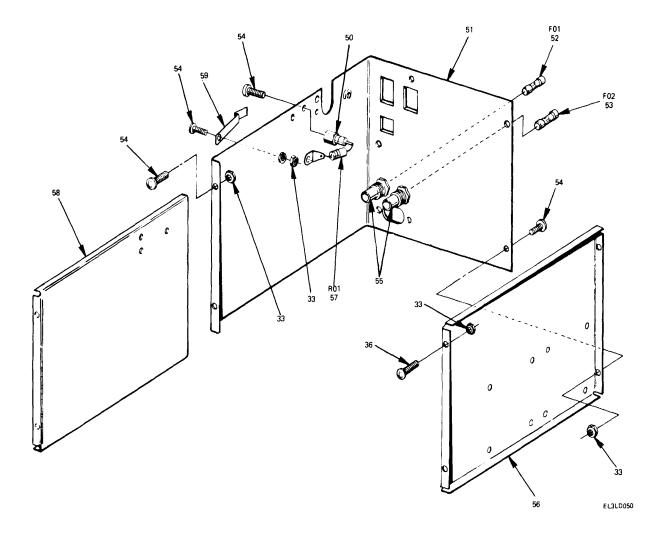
Electronics Package Assembly (Sheet 2 of 2) 12
